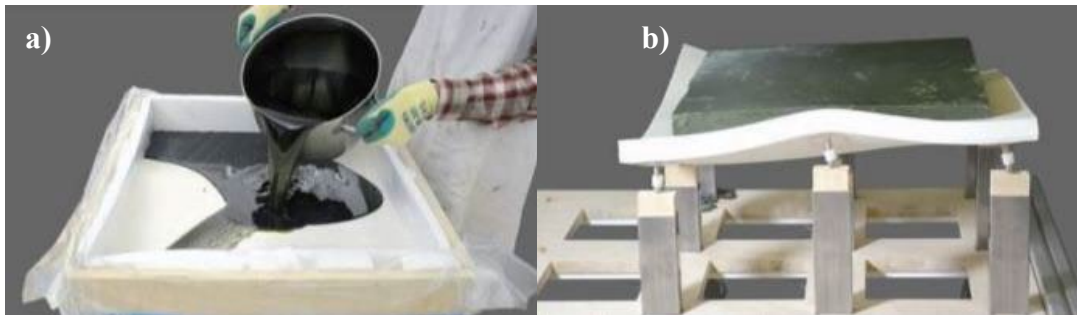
a) In left Casting hot wax in mold and b) right Formed wax element on the mold (Oesterle).
